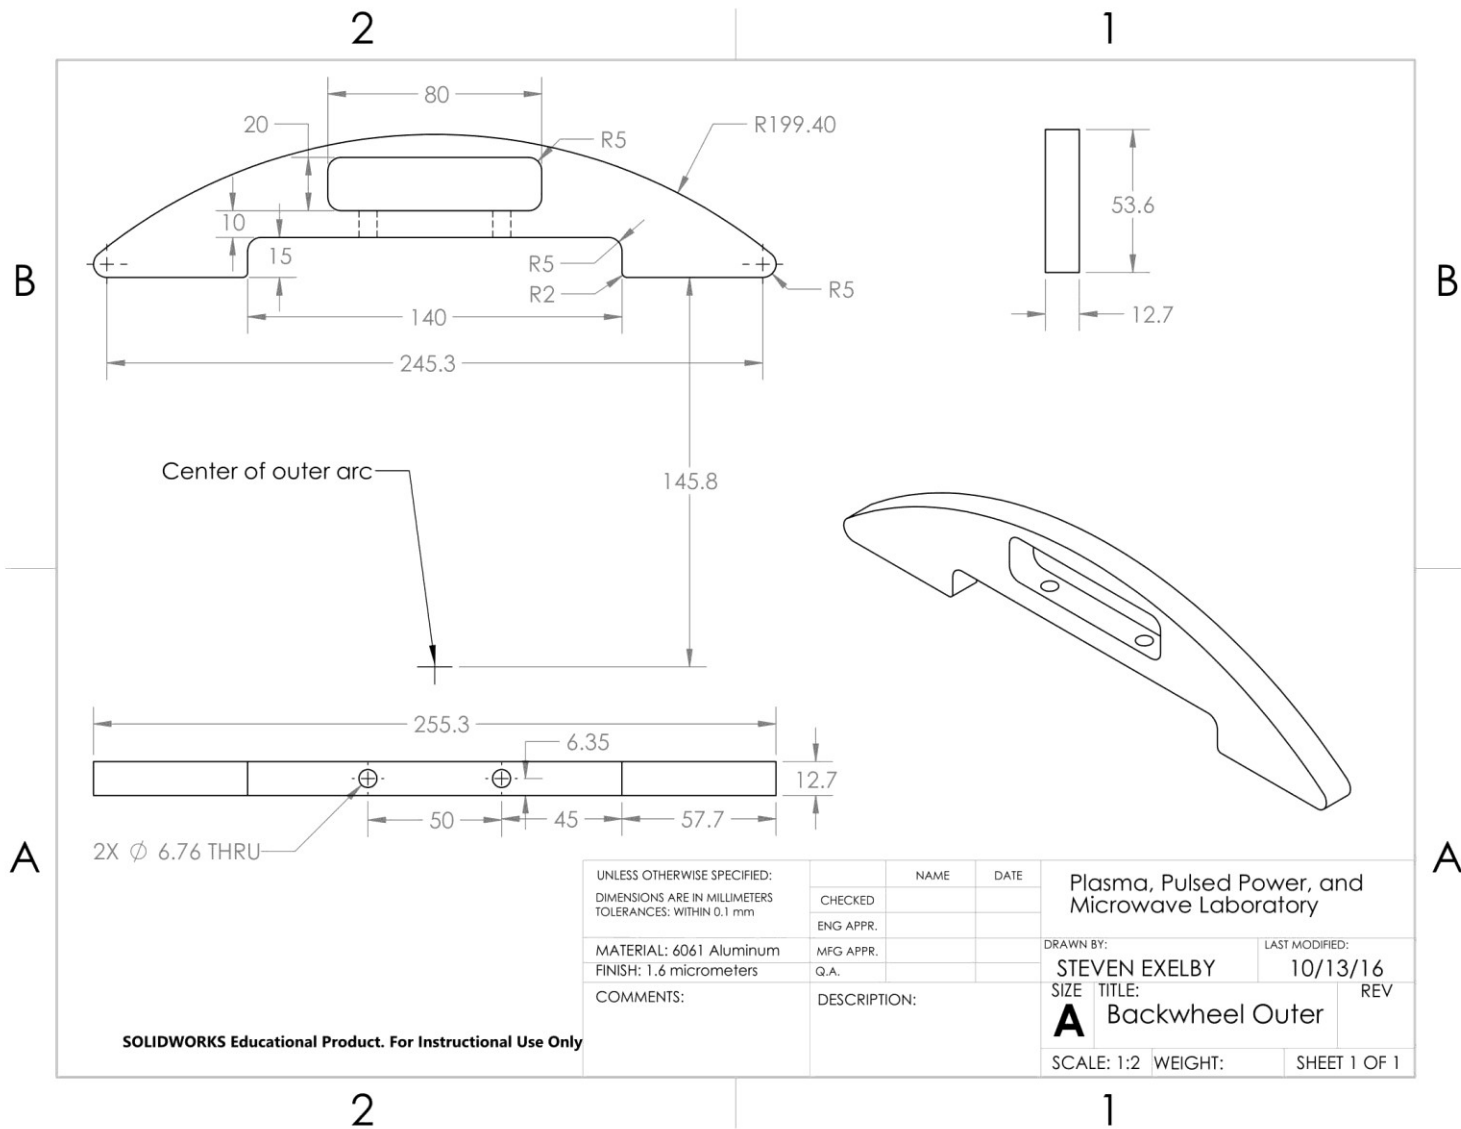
Outer piece of the back wheel. Four of these surround the center piece on threaded $\frac{1}{4}$ " rods lock the RPCFA into position.
